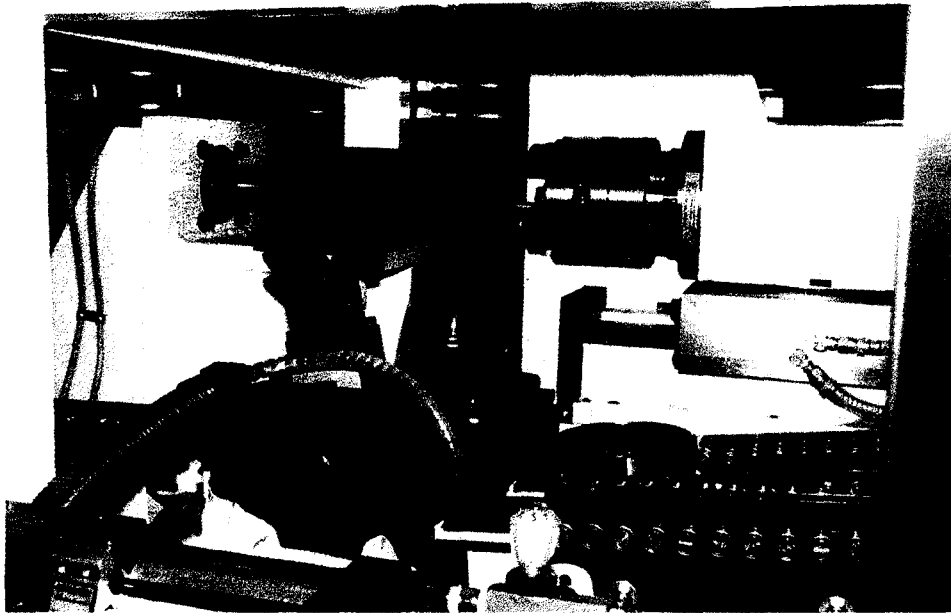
B—Production Welding System for Automotive Transmission Components
